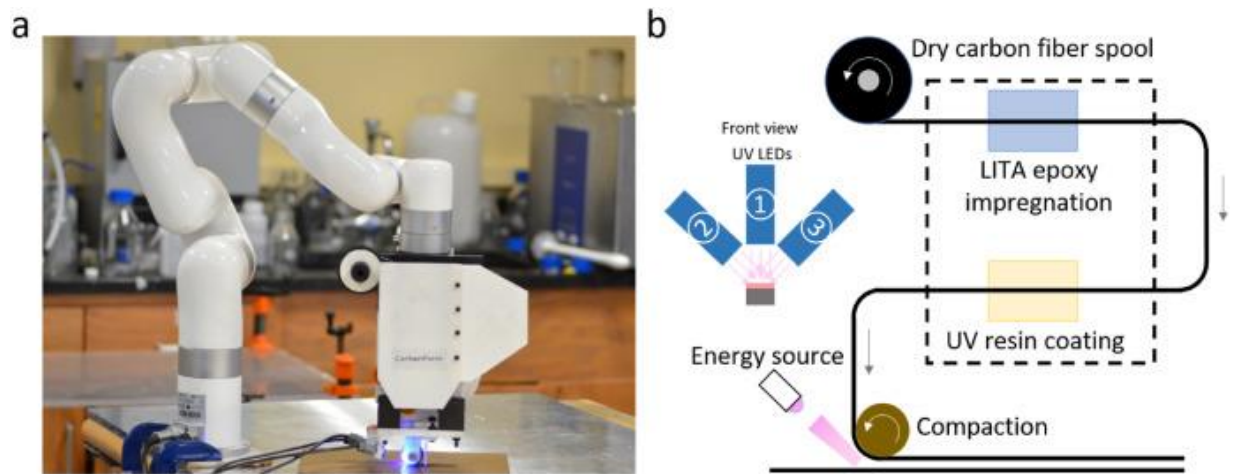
Dual epoxy continuous carbon fiber composite 3D printer head [34].
